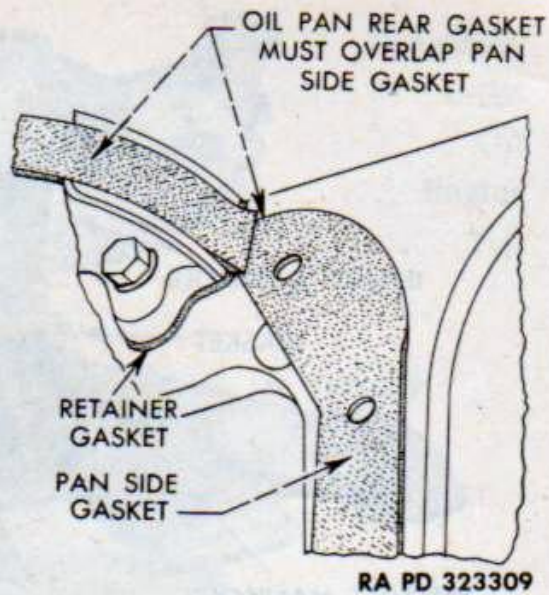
Oil Pan Side Gasket Overlapped by Rear Gasket
